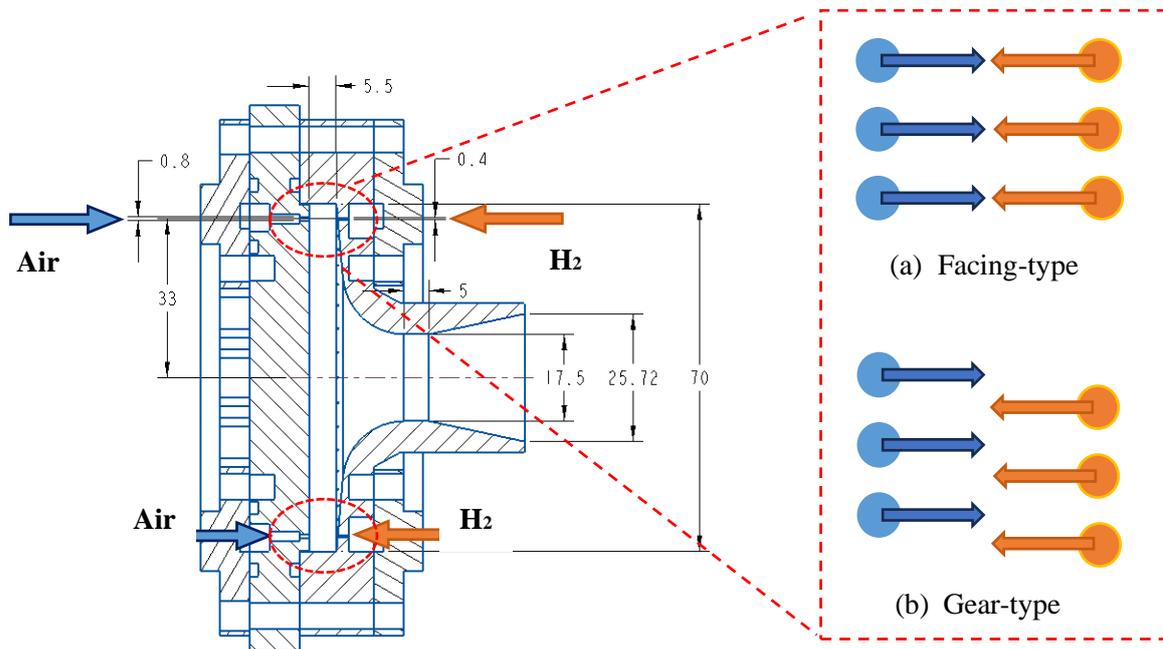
(Left) Cross-section of the DRDE, (Right) injector arrangements: (a) Facing type, (b) Gear type
